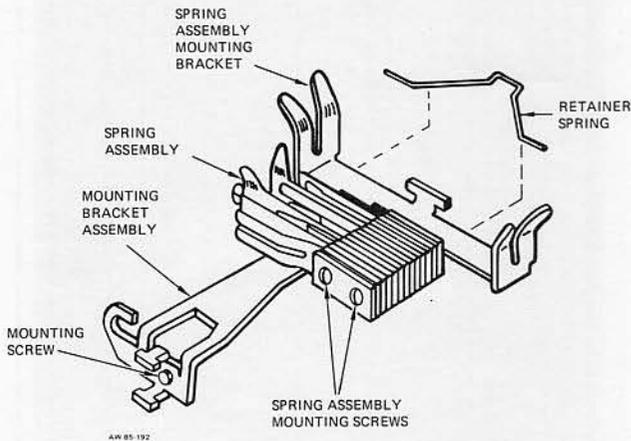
Models 79613 and 79971 Exclusion Switch Assemblies, Component Locations
